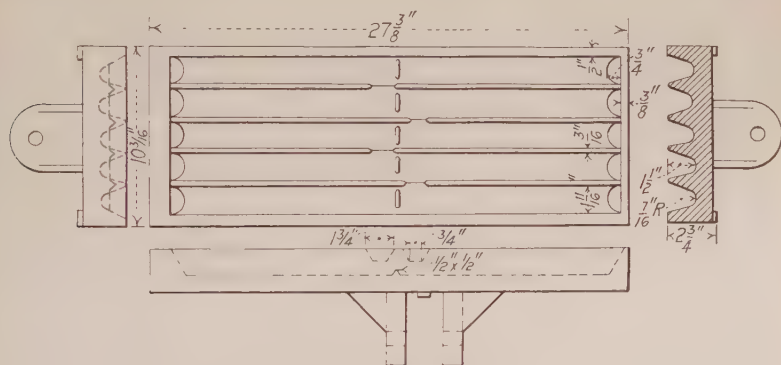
CONSTRUCTION OF STICK MOLD.
